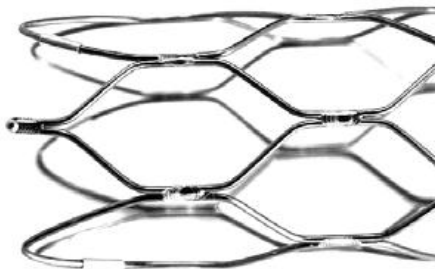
Nitinol Wire Welded to Form a Closed-Cell Structure (Stoeckel, Bonsignore, & Duda, 2002)
